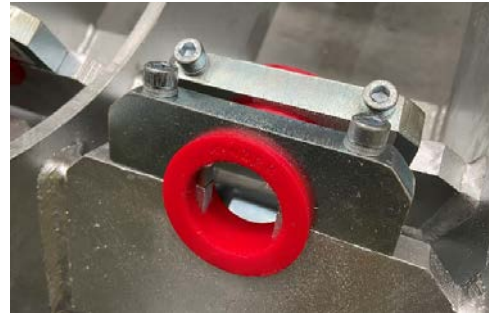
Roller bush to minimise steel on steel contact (roller not shown as not supplied)
